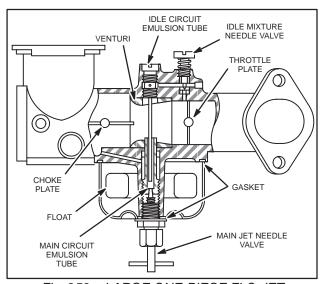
LARGE ONE-PIECE FLO-JET CARBURETOR
